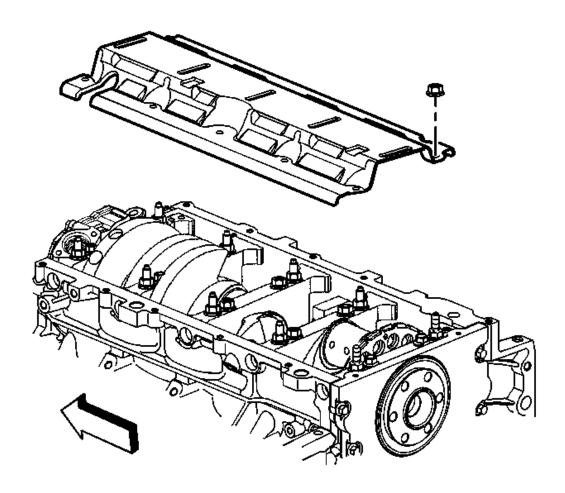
View Of Crankshaft Oil Deflector Courtesy of GENERAL MOTORS CORP.
